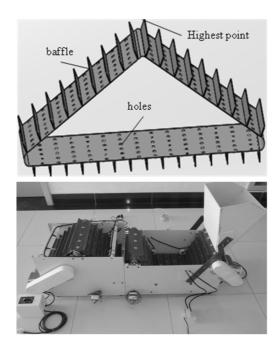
Top-cleaning conveyor belt, right-actual structure of the prototype
